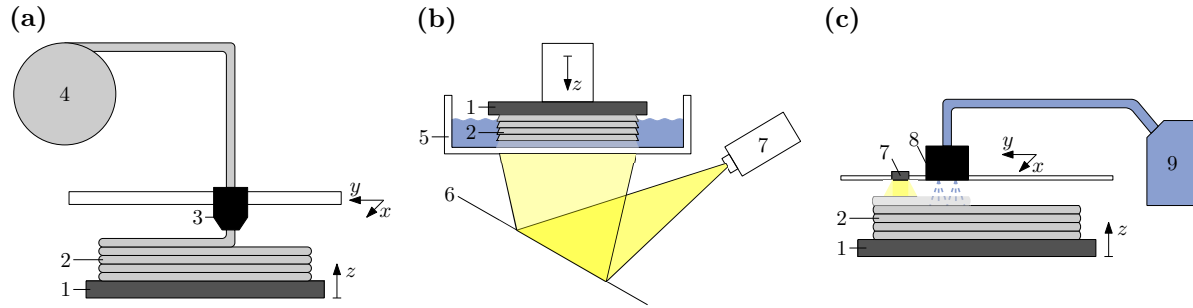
Schematics of 3D printing methods used in this thesis: (a) fused filament fabrication; (b) digital light processing; (c) polyjet/multijet. 1 – printing platform, 2 – 3D printed object, 3 – extruder with printing nozzle, 4 – printing material, 5 – vat with transparent bottom containing 3D printing material, 6 – mirror (array), 7 – UV-light source, 8 – printing head, 9 – material tank.
